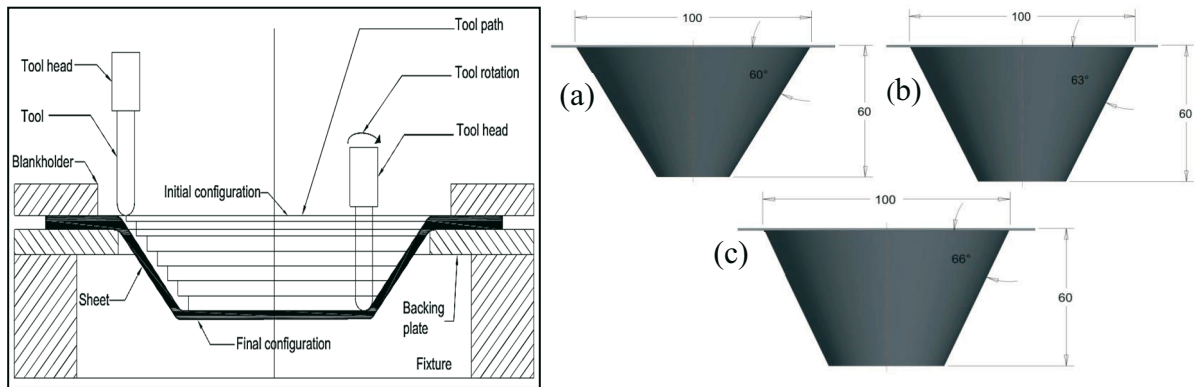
(a) Schematic representation of the SPIF process; (b) Dimensions of the target geometry
